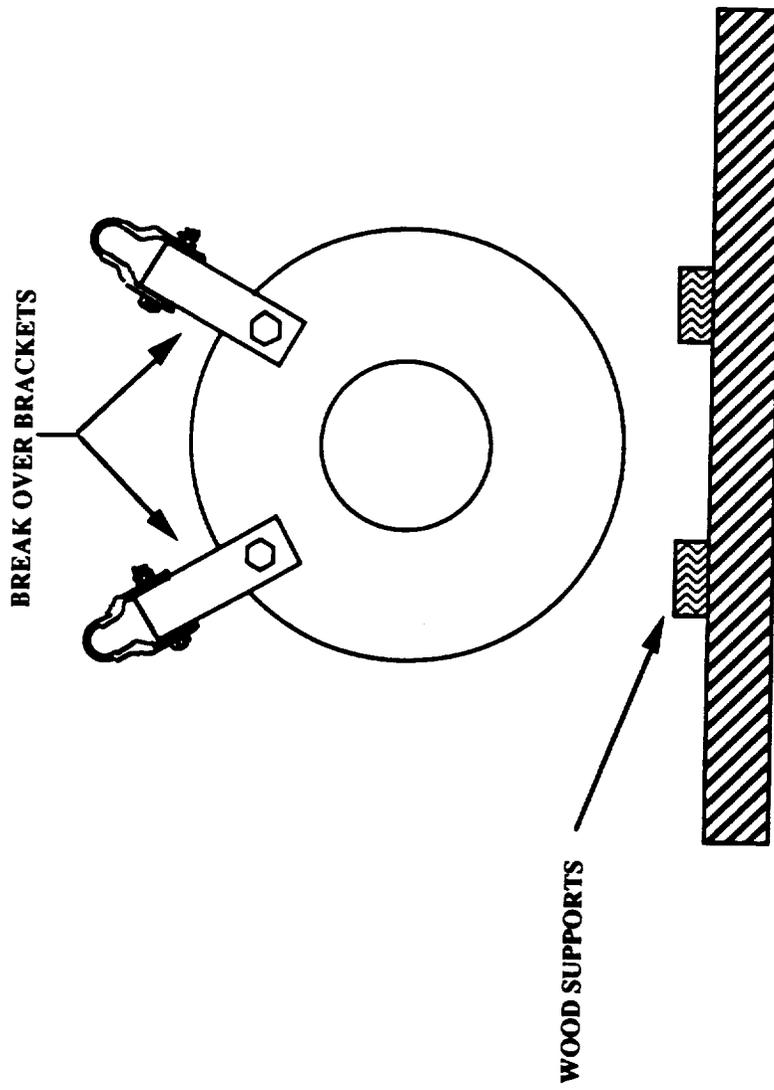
BREAK OVER BRACKET ASSEMBLY
